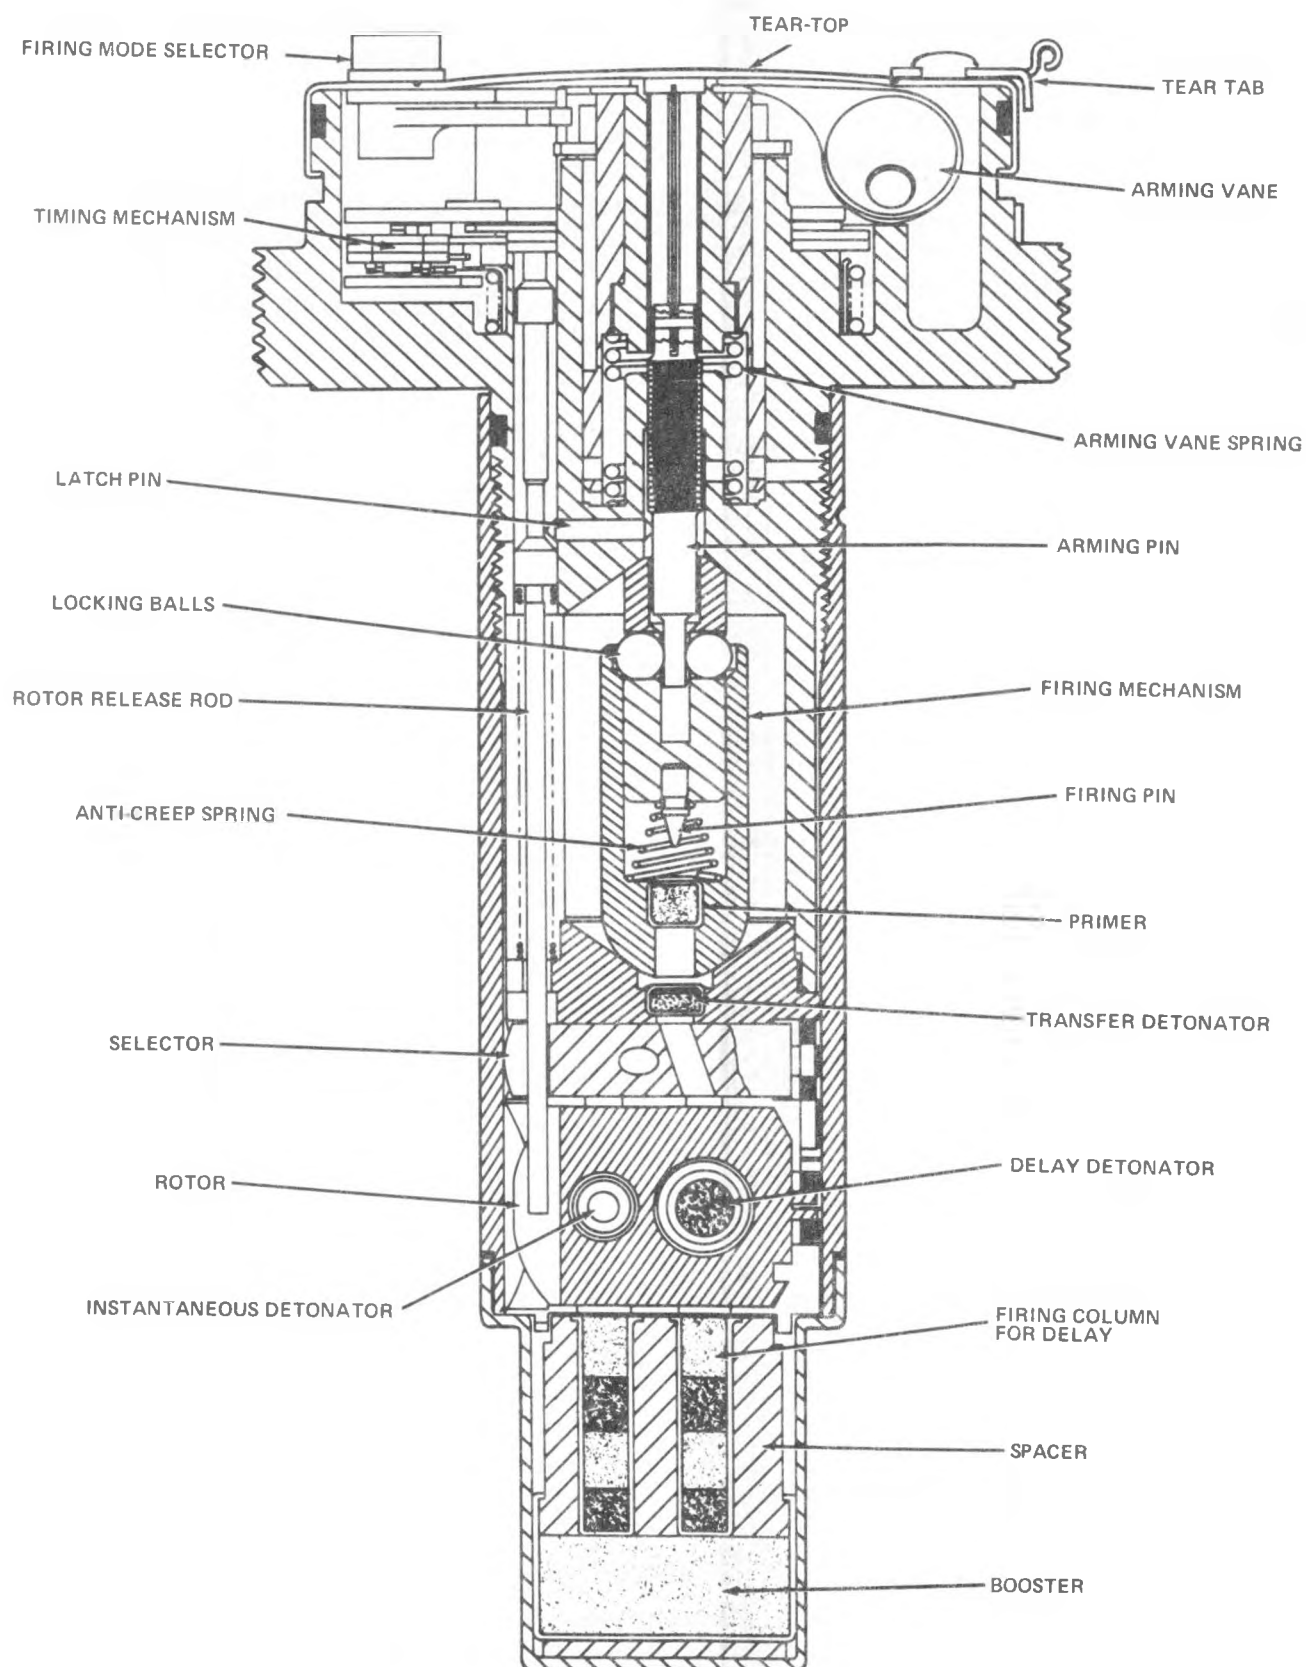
Mechanical Bomb Fuze MK 343 Mod 0 — Cross Section View
